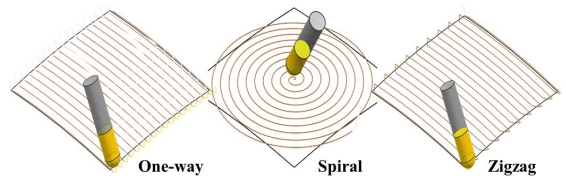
Tool posture & Cut pattern in 5-axis machining
